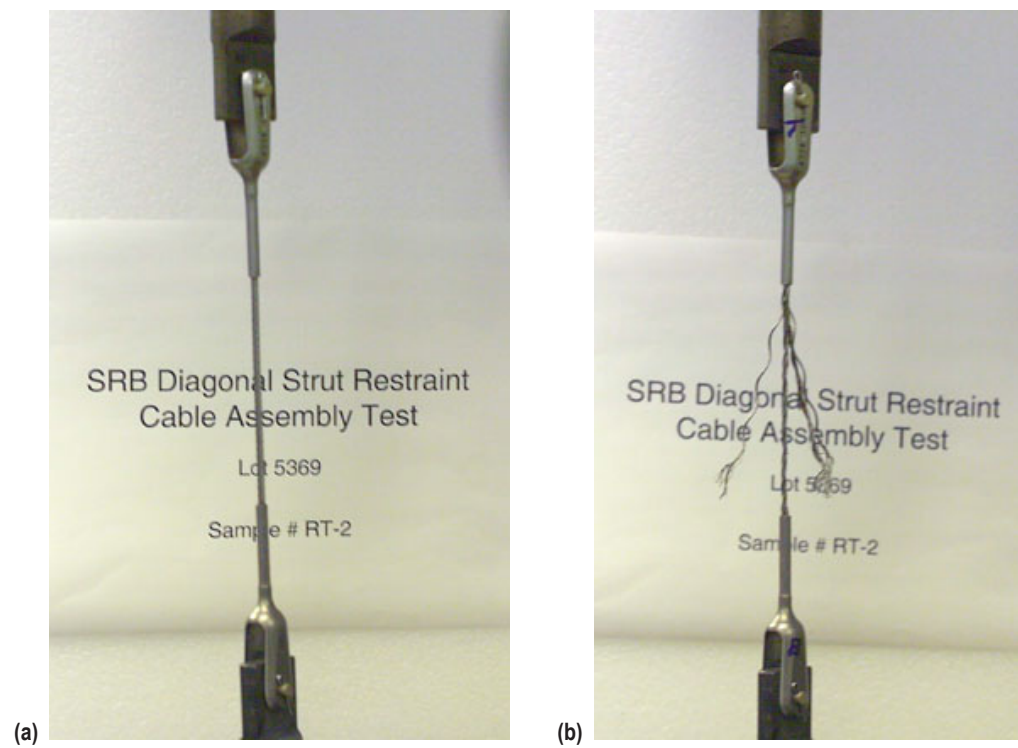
5369–RT–2 (a) before testing and (b) after testing.
